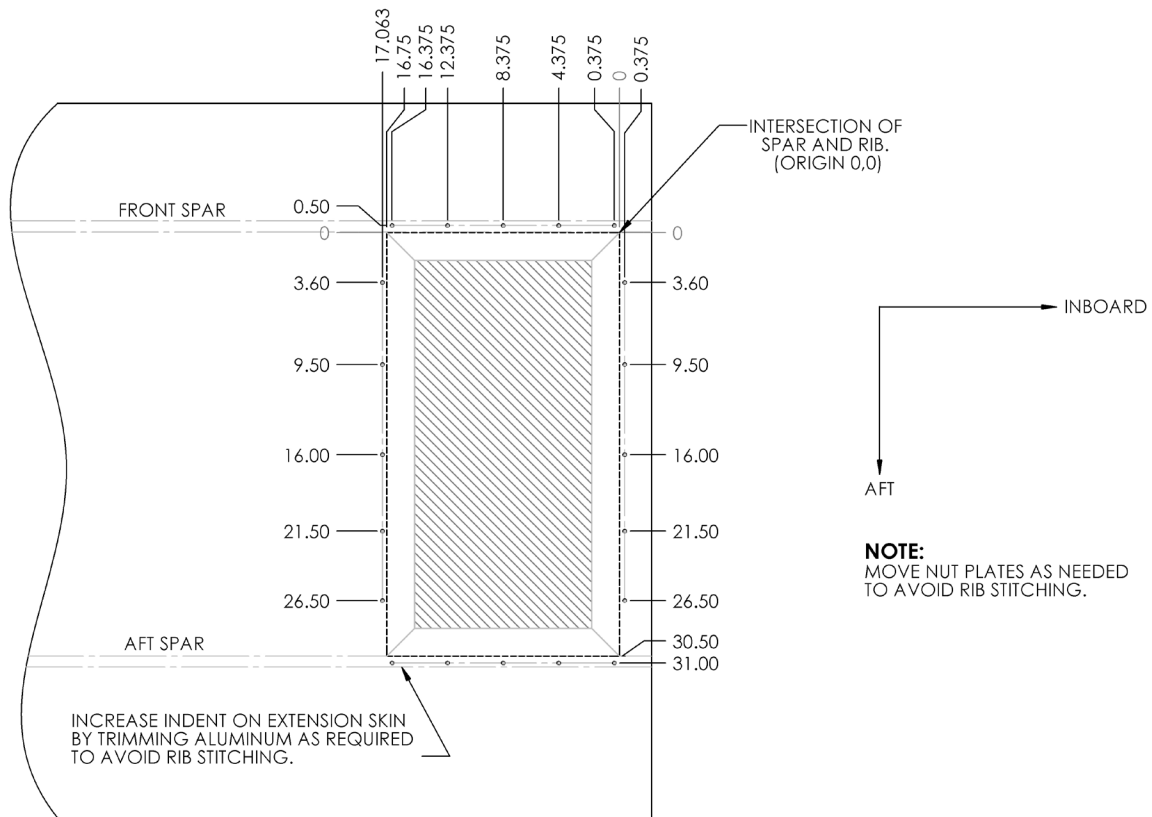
Tank Bay Hole Locations (All Tolerances within 1/8”)
